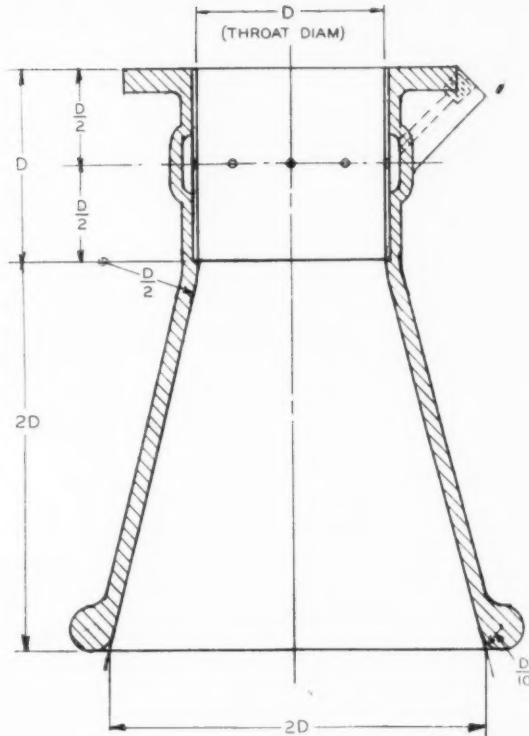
DIMENSIONS RECOMMENDED FOR INTAKE METER
